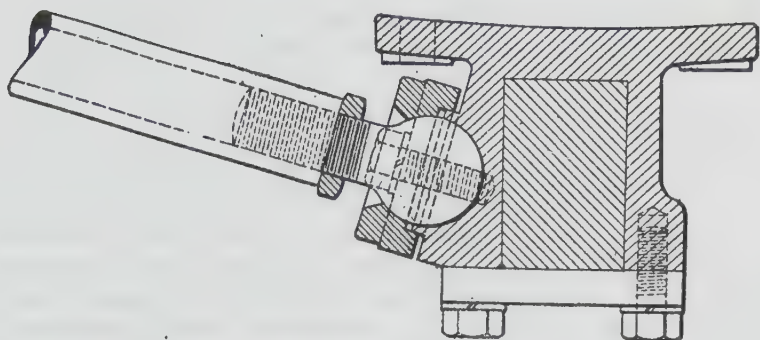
RADIUS ROD SPHERICAL REAR JOINT.
